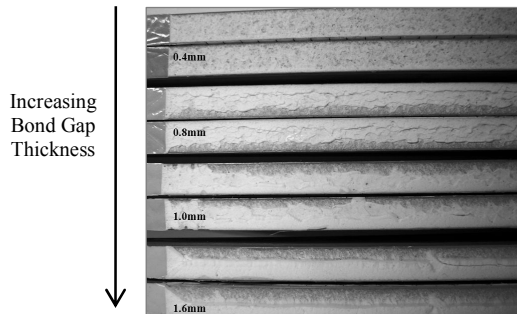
Fracture surfaces illustrating transition to slant fracture on aluminium TDCB specimens.
